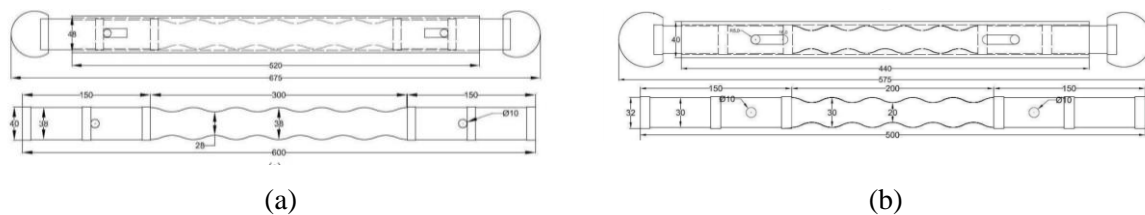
Detailing of AFLD design (Unit: mm): (a) Test 1, (b) Test 2 [14]
